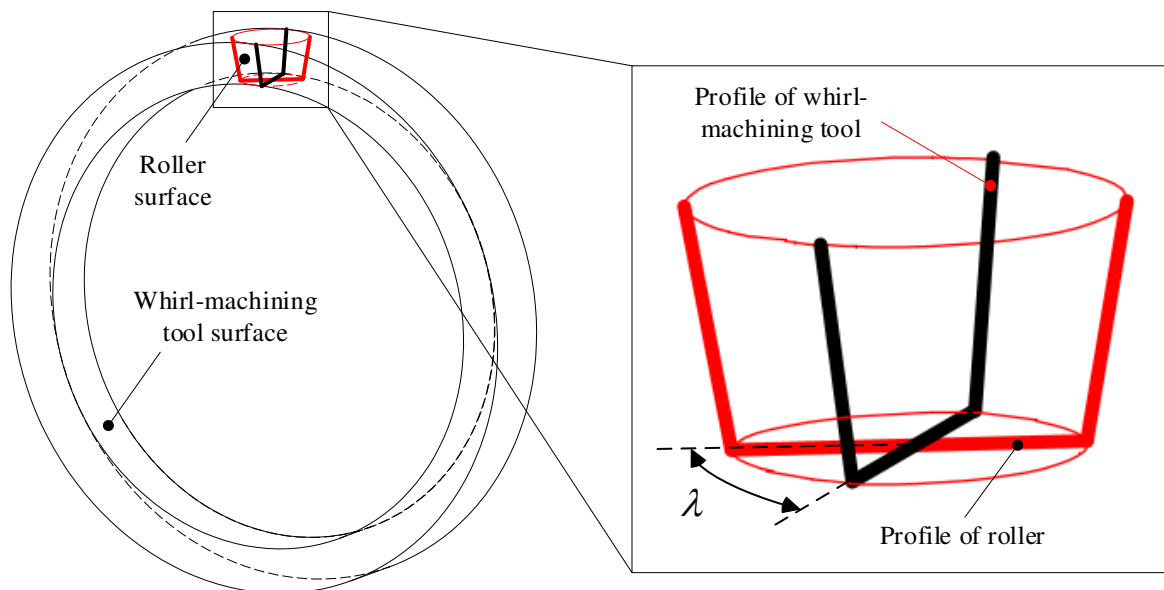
Relative position of whirl-machining tool profile on the roller profile
